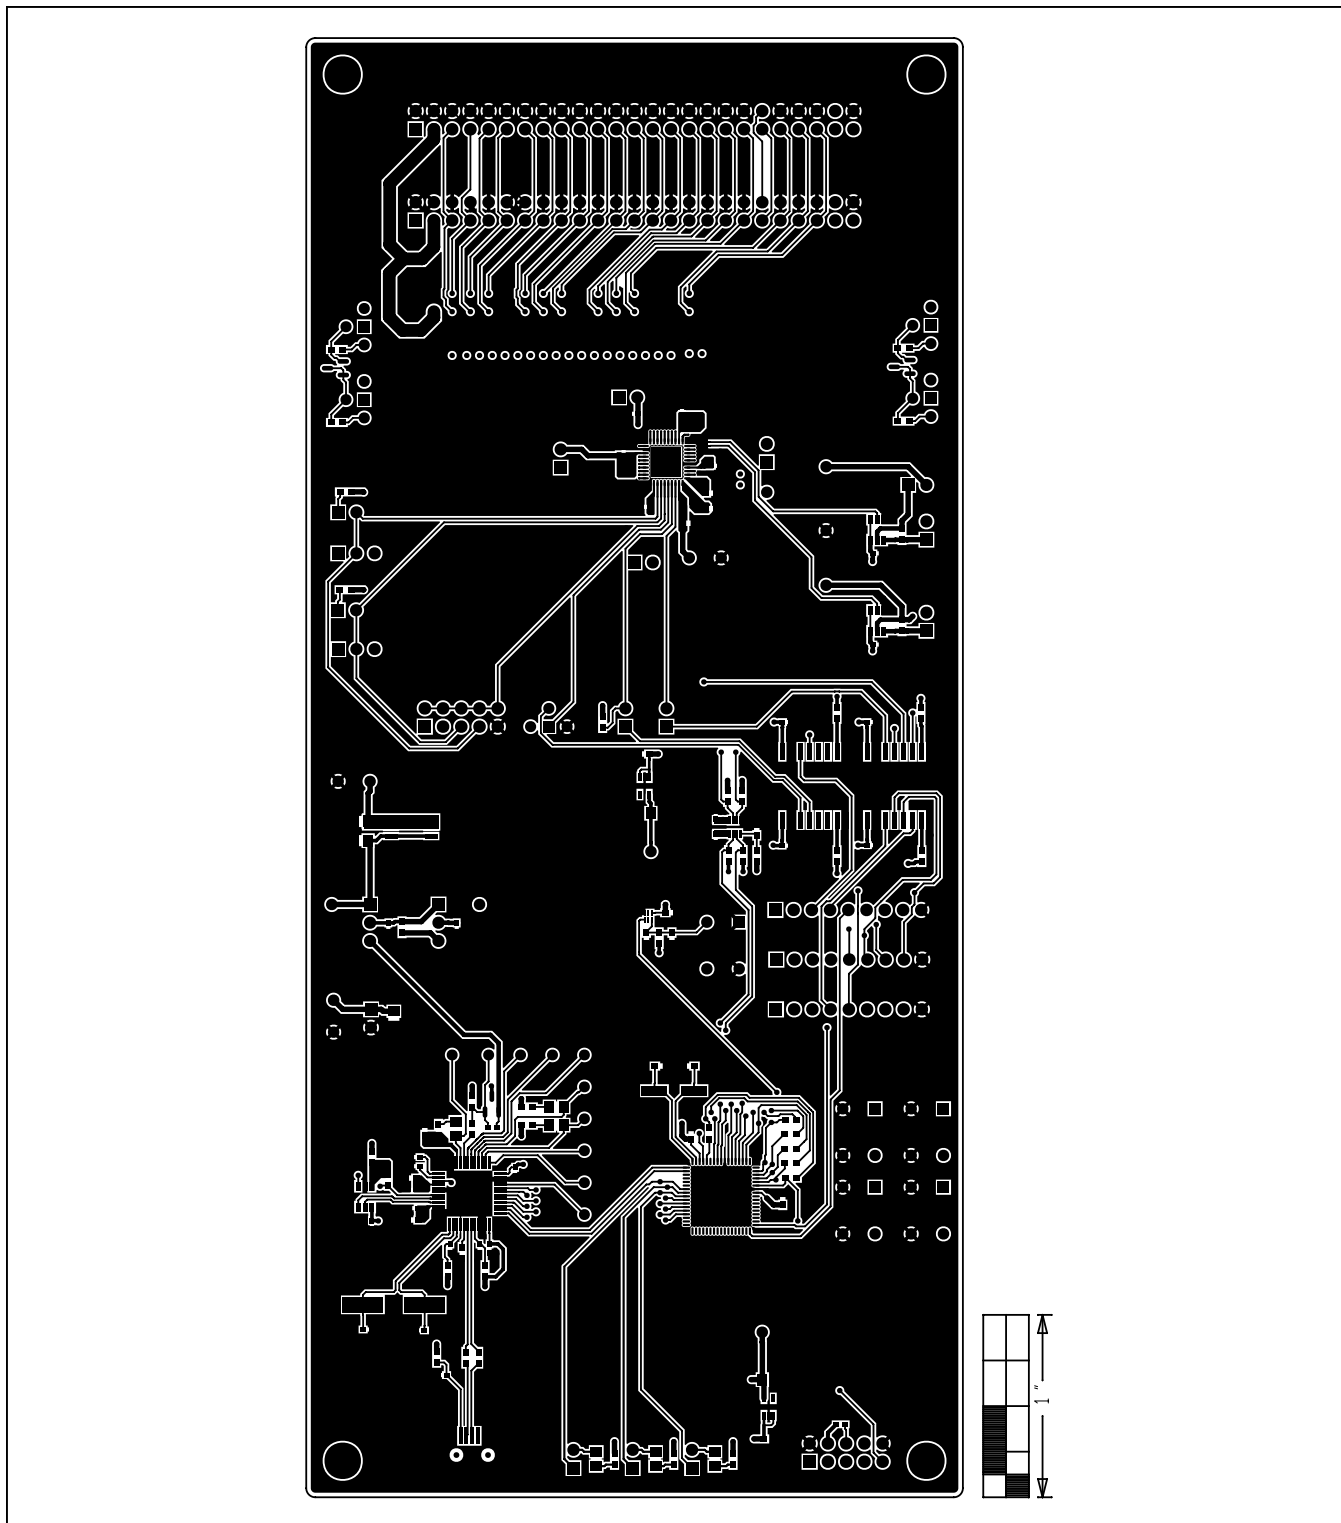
MAX11301 EV Kit PCB Layout—Component Side
